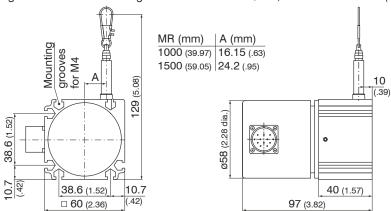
Dimensional drawing ... - FD60 - CR - SSI, dimensions in mm (inches), not to scale
